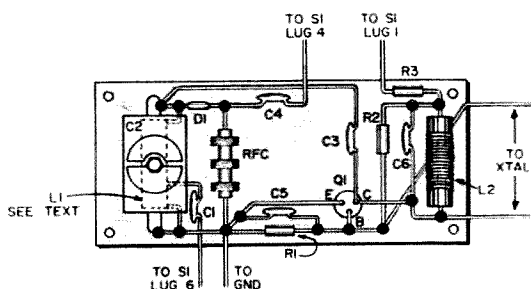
Layout of the OTC. The converter is built on a 1" x 2" piece of perforated board.
